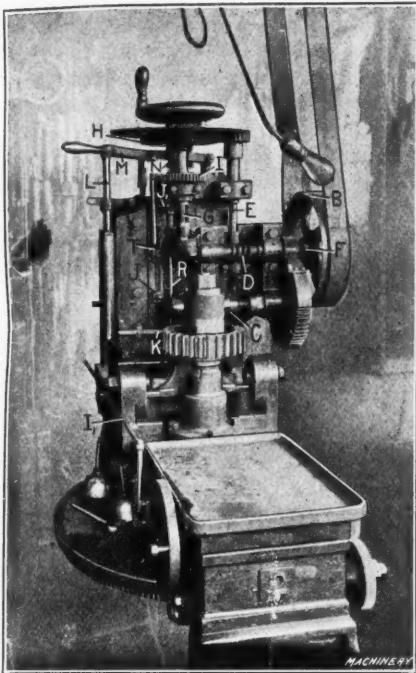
Old Freeland Hand-operated Gear-cutting Machine, converted into an Automatic Gear-cutter
